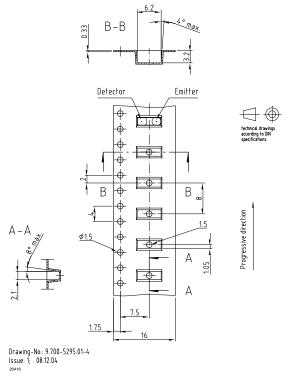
Tape for 1.9 - mm Package Top View Oriented
